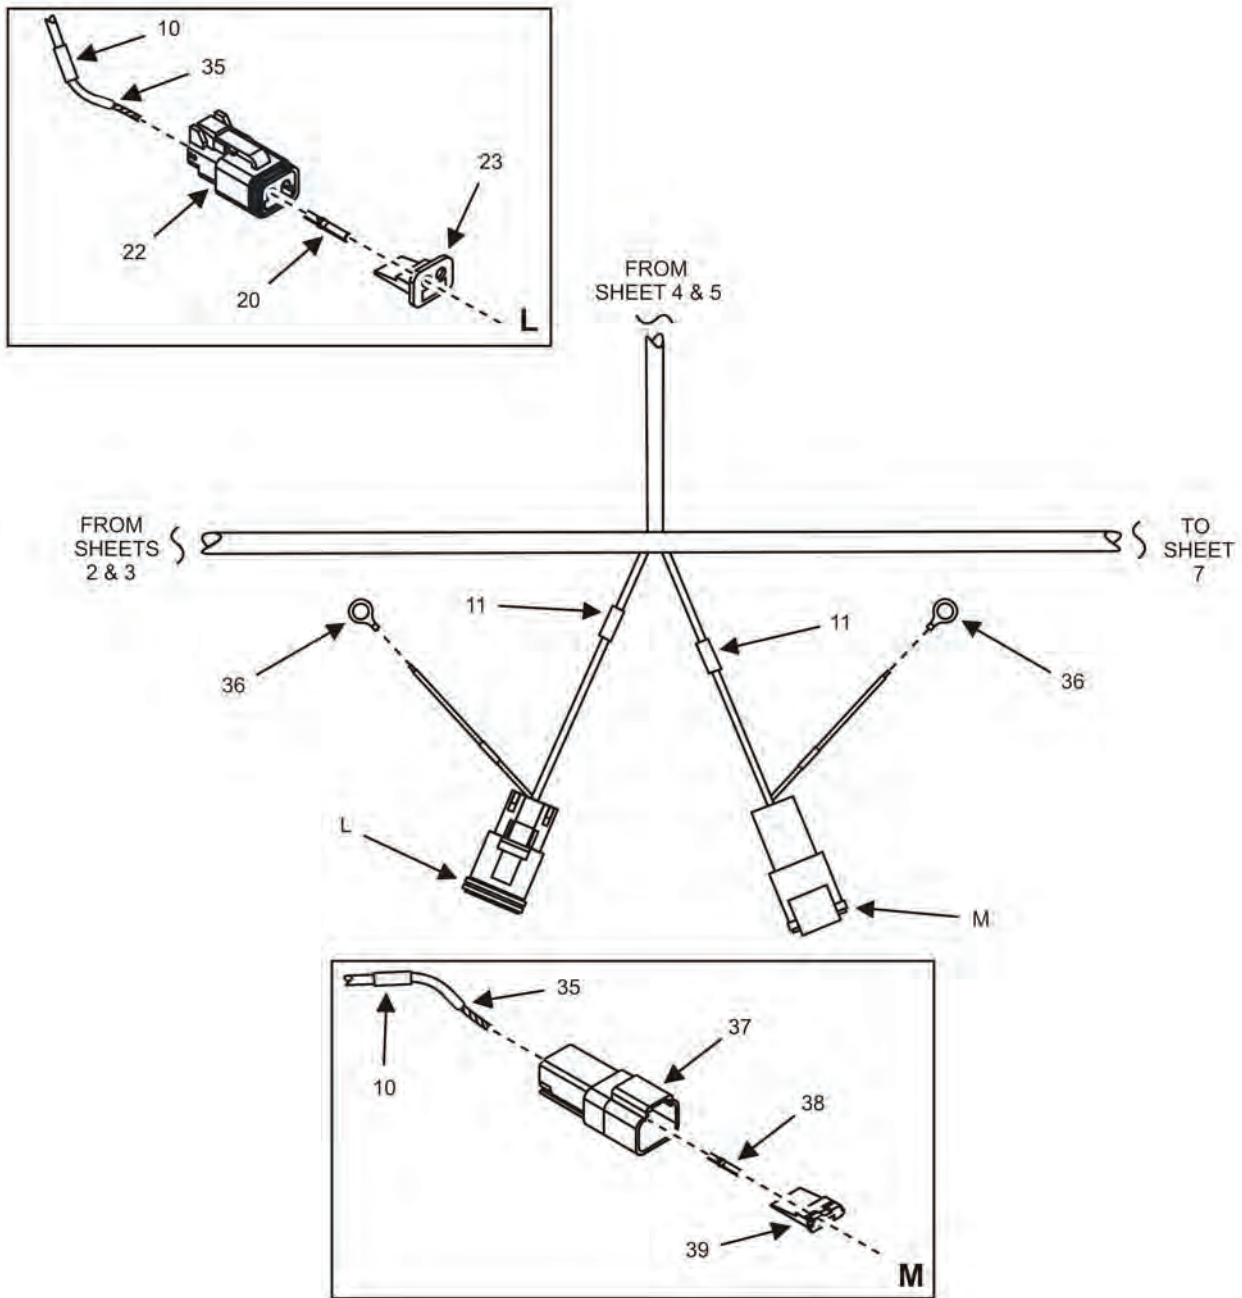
Engine Wiring Harness (Sheet 6 of 13).
